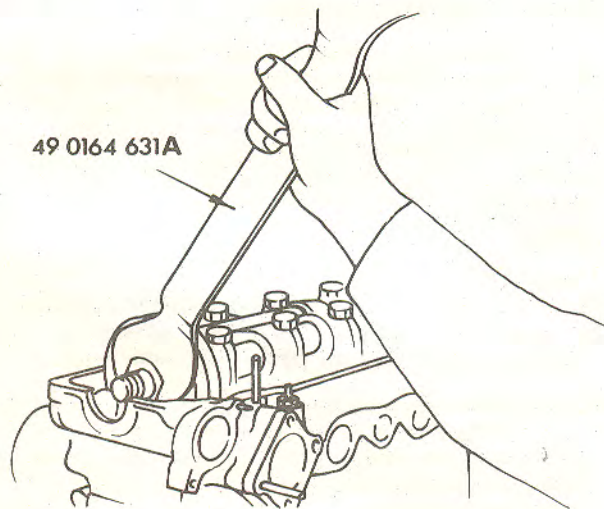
Removal of the locknut for the camshaft sprocket. The distributor drive gear has already been removed from the end of the camshaft.
